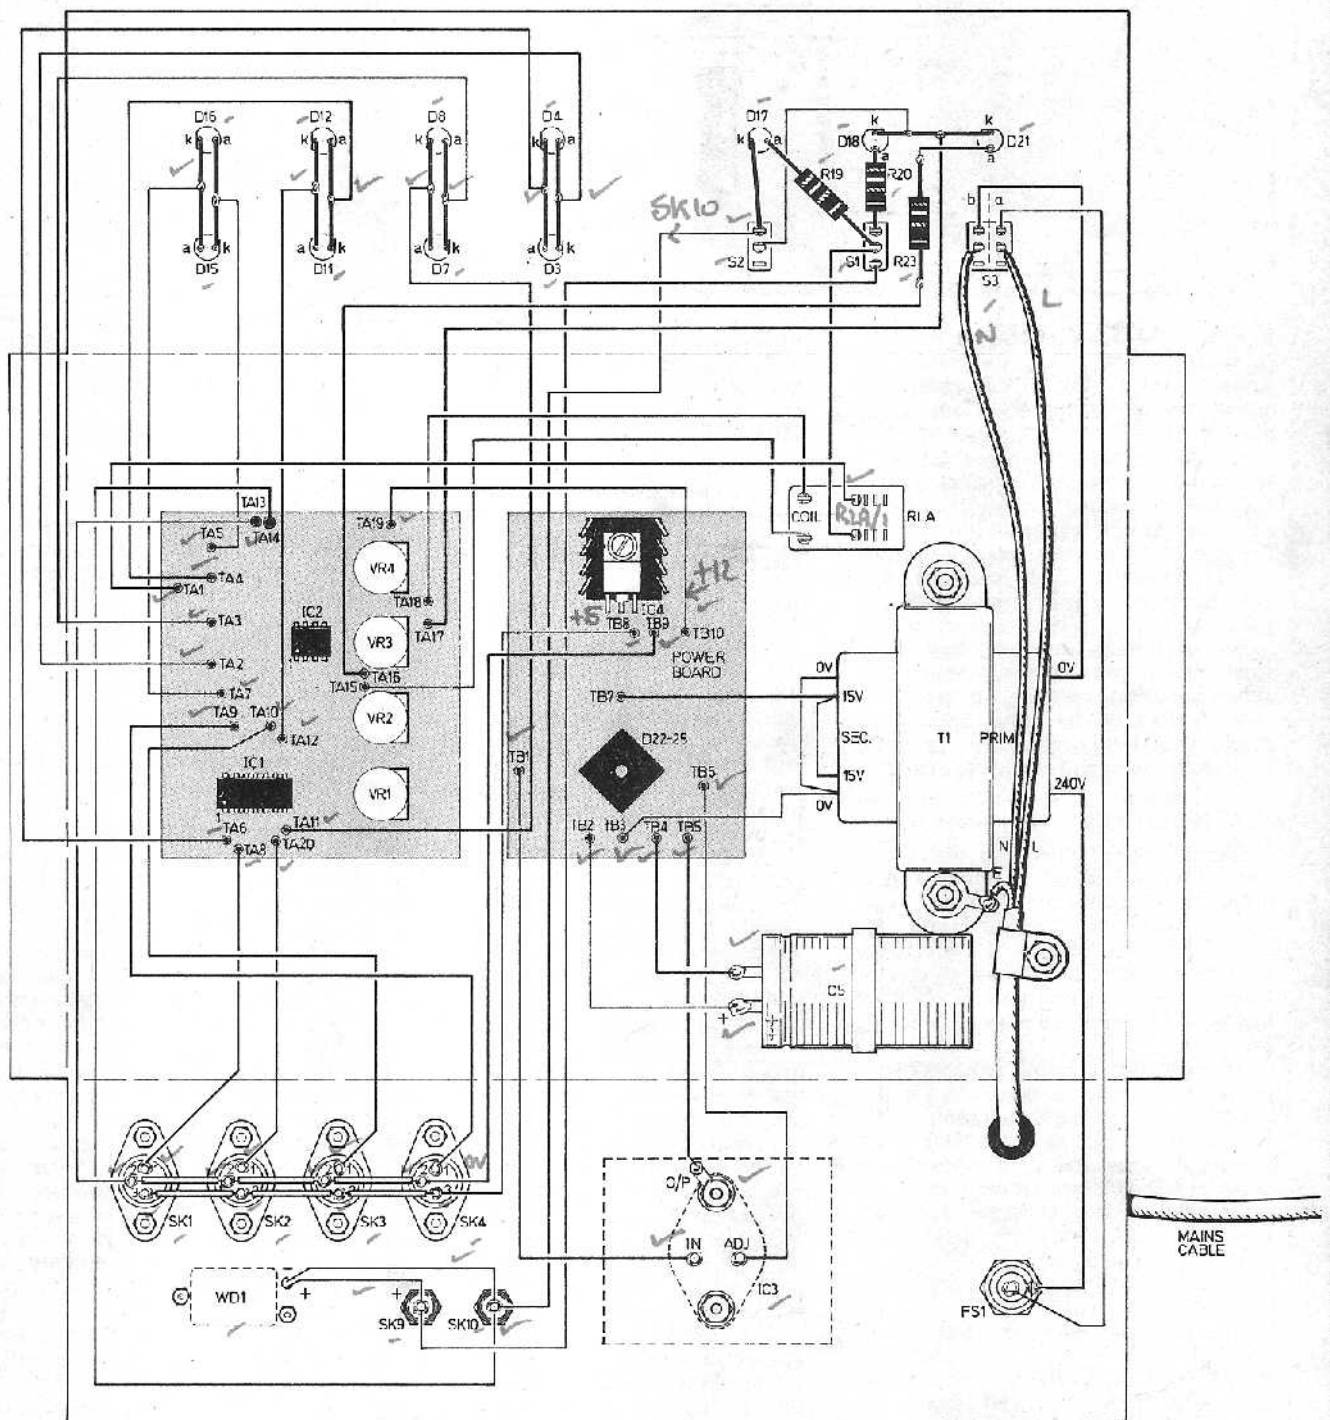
Interwiring between the two boards and the chassis-mounted components.
